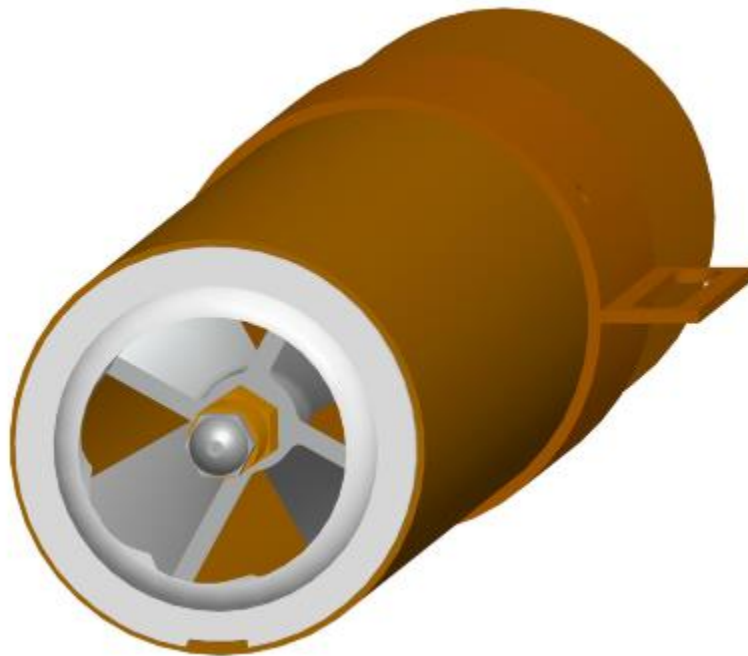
Position of Turbulator at the end of the Draft Tube
